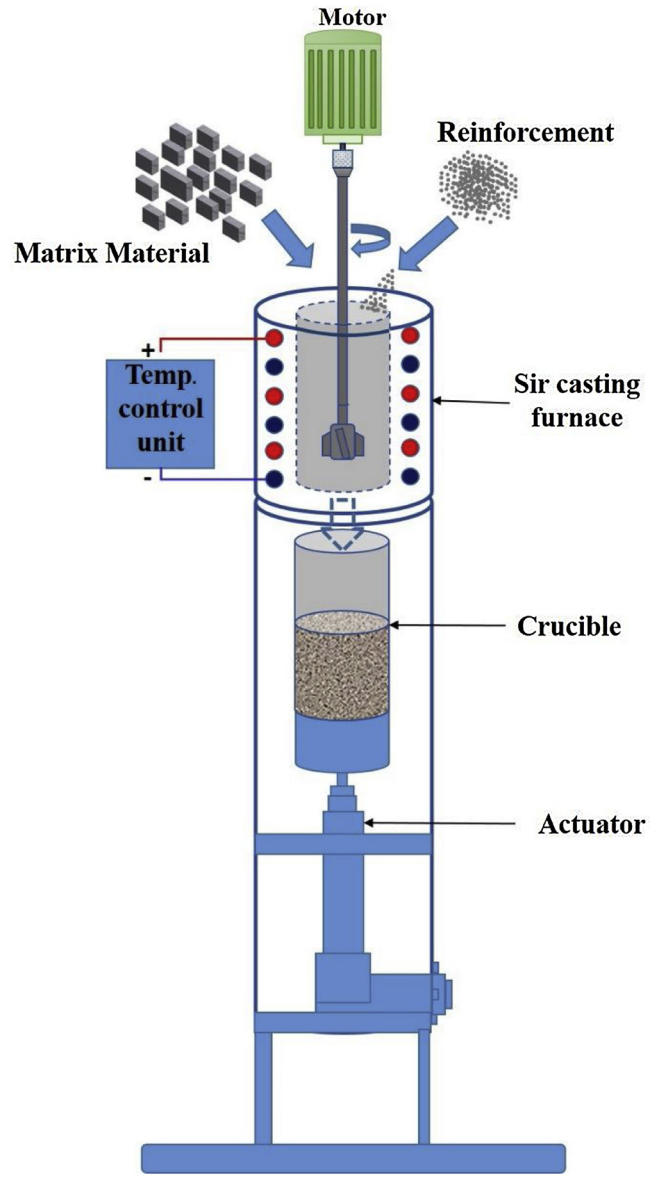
Quick quench stir casting [Redrawn from [126]].
